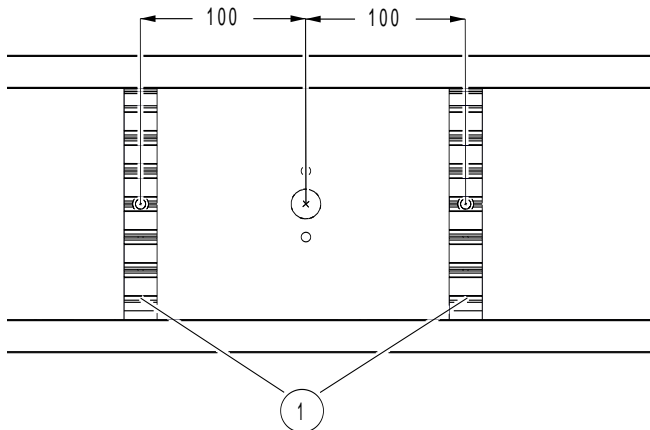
Distance between hanger clamp and the sliding contact sensor unit
